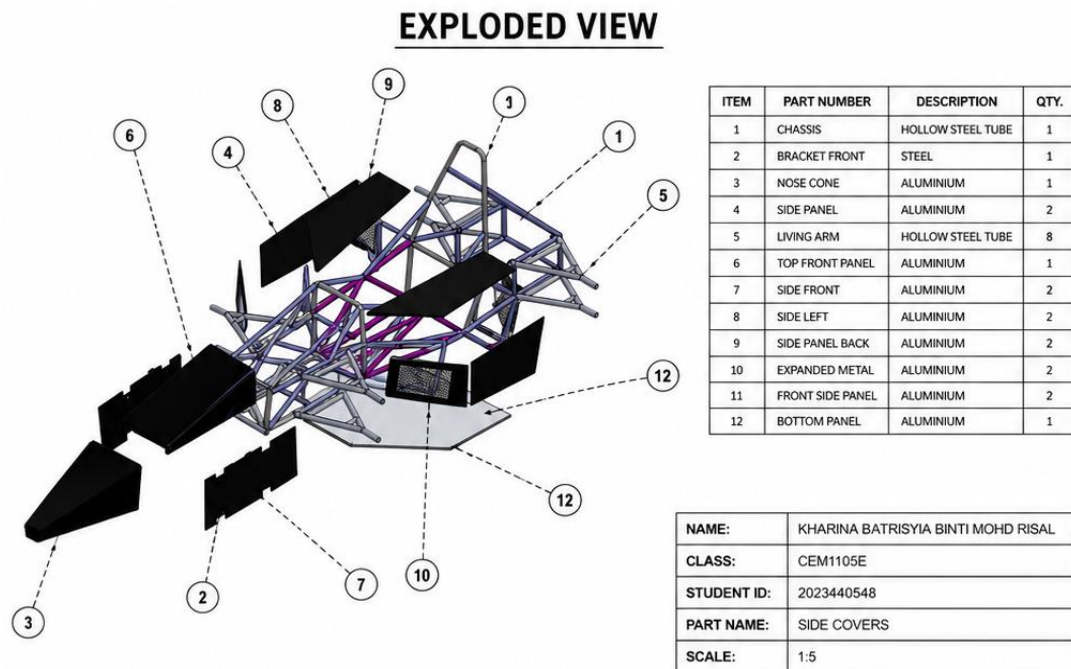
The exploded view of the fabricated aerodynamic body kit assembly
